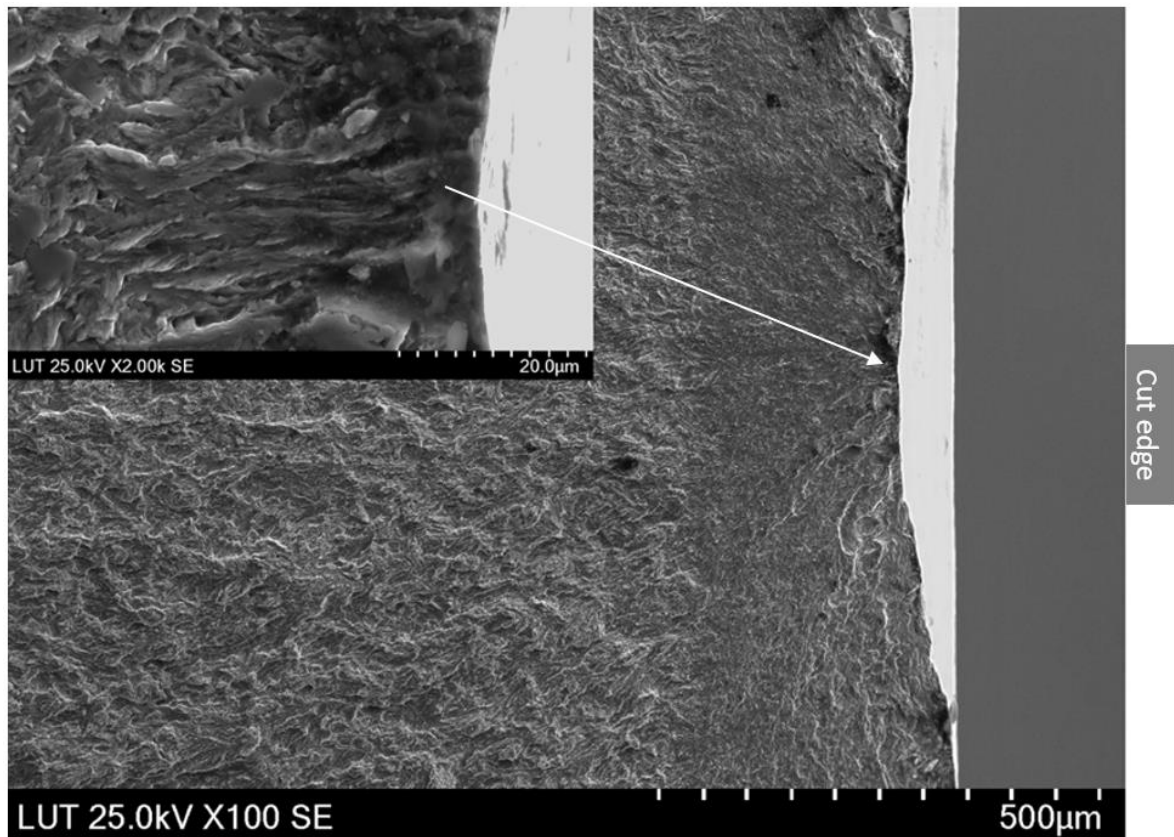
Fracture origin on burr ground LF specimen.
